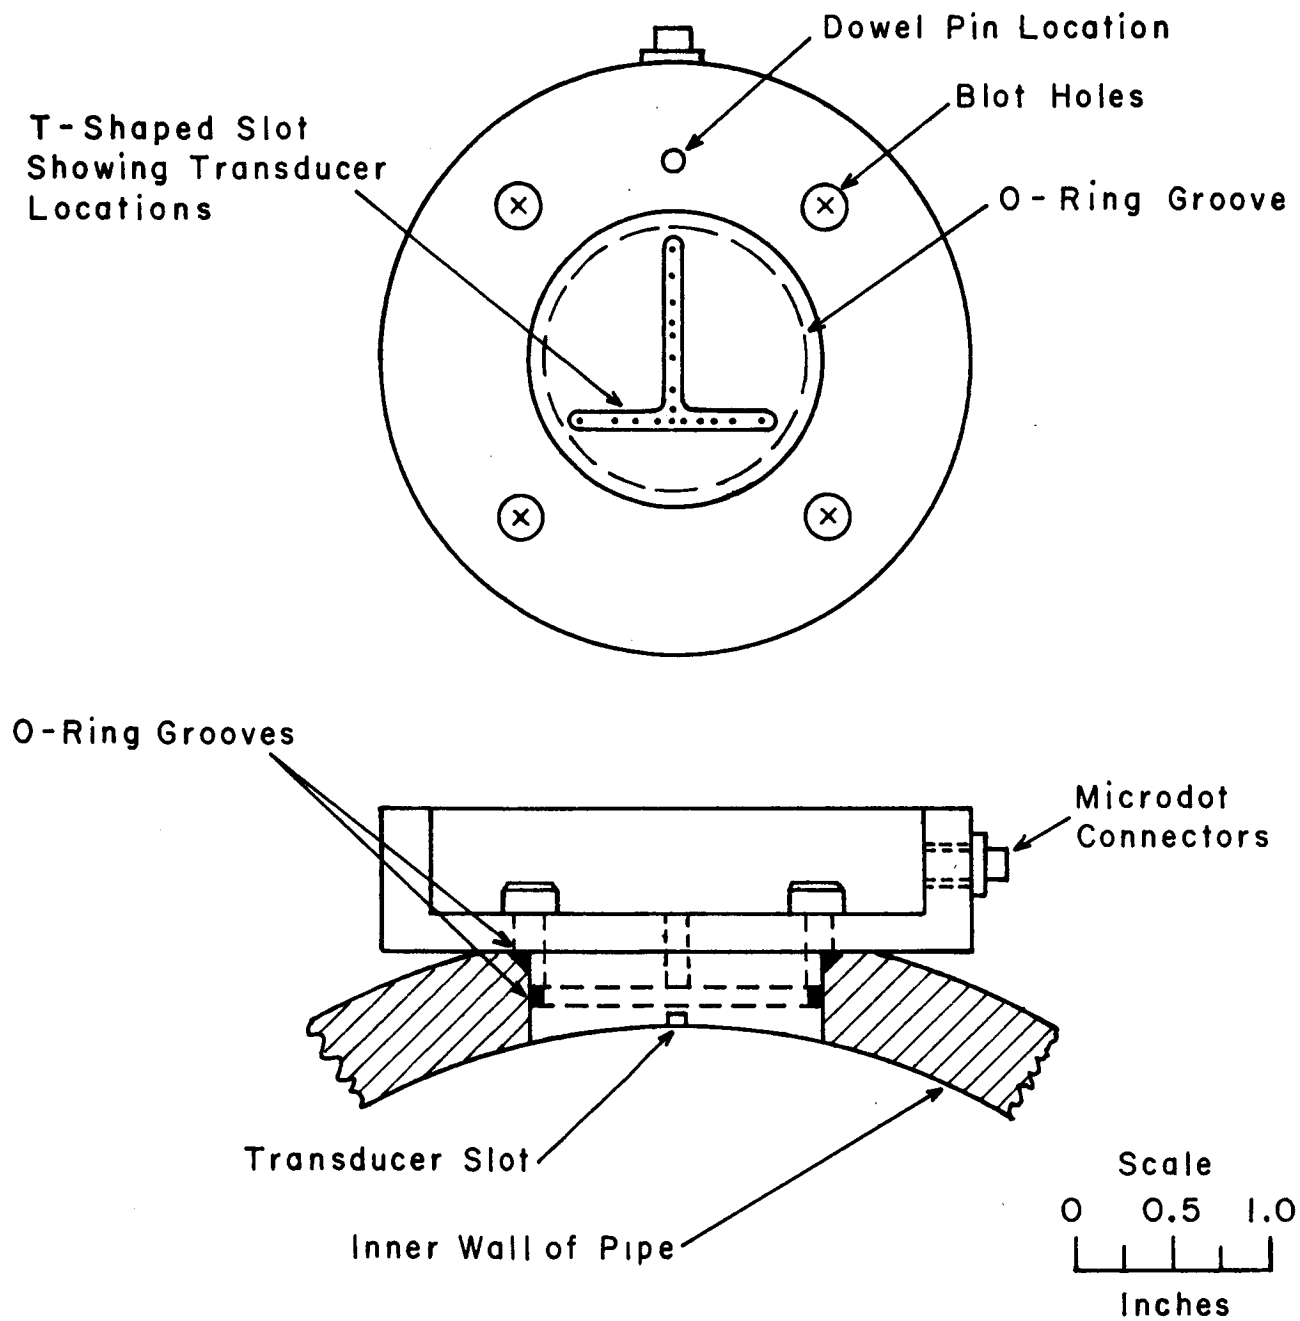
PRESSURE TRANSDUCER ASSEMBLY.
